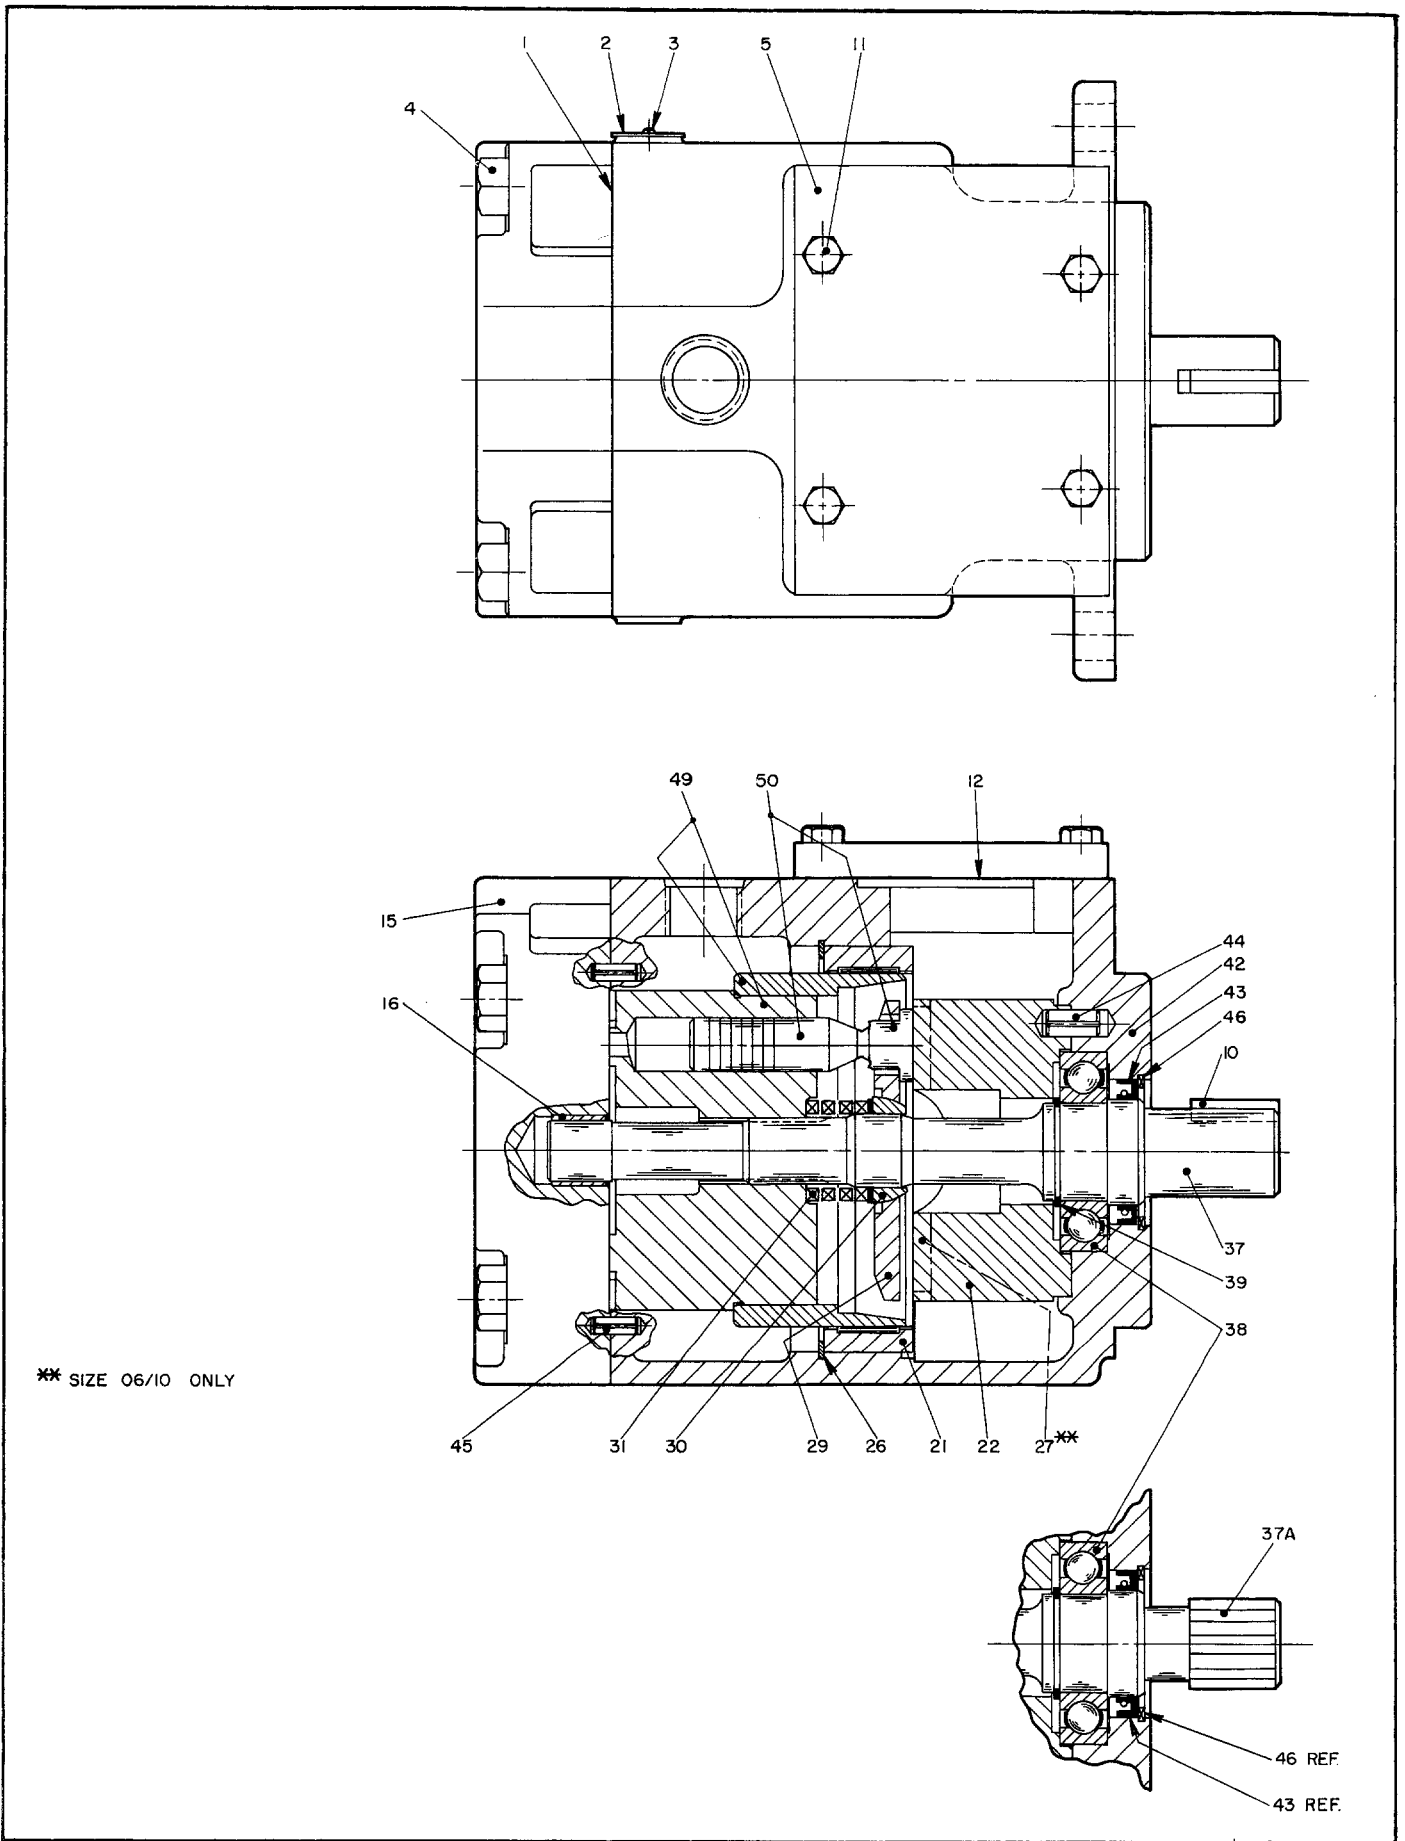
Parts Drawing, Hudura Type "MFQ" Bi-Directional Motors (510237)
